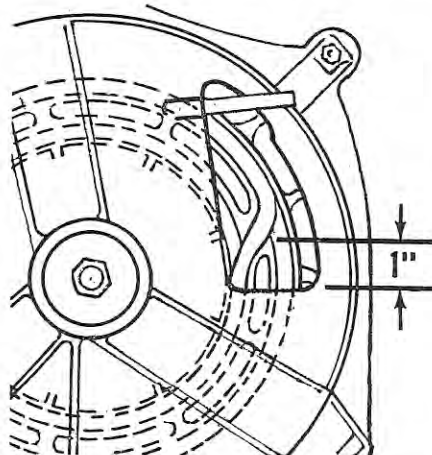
Schematic view of compression release cam groove which is machined into top of starter pulley. Starter rope must be adjusted so that point of cam is 1 inch from edge of opening in starter housing as shown.
